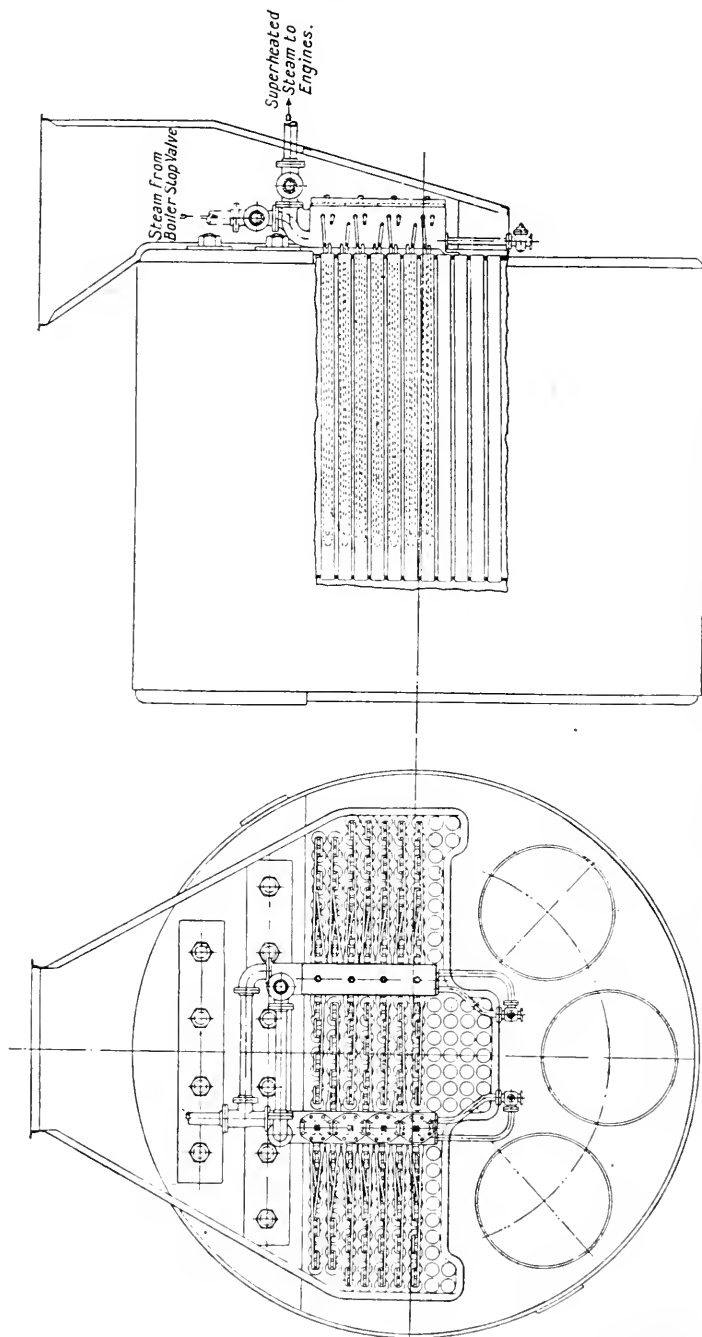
Arrangement of Superheater for Three-Furnace Boiler.
